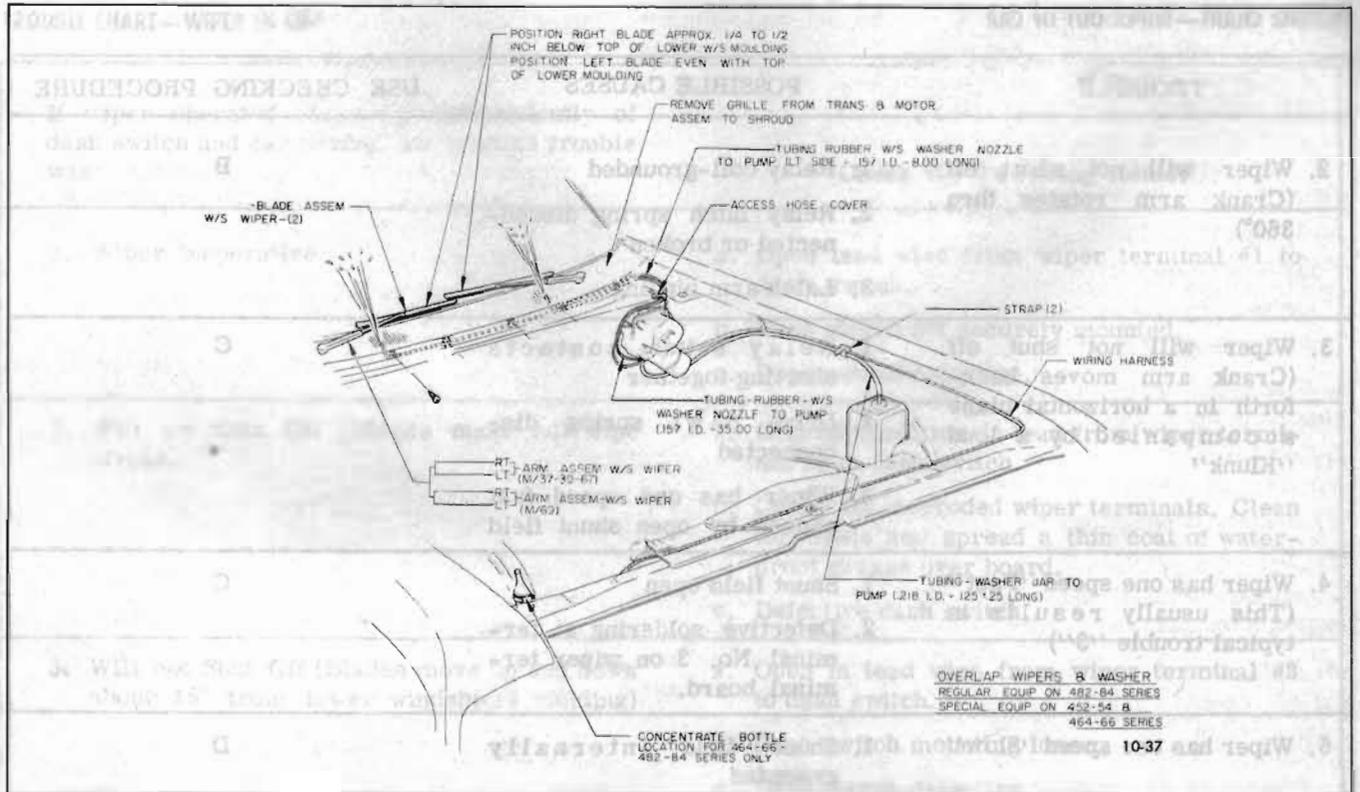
Wiper Arm Installation - 45-46-48000 Series
